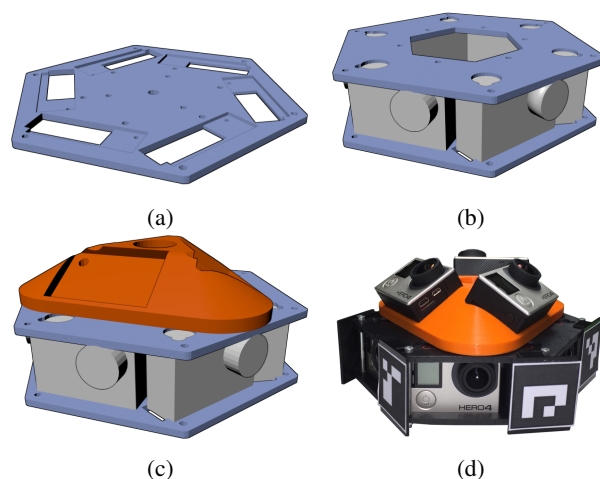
a) Baseplate of our rig. Battery is accessible in assembled rig. b) Assembled circular rig consisting of 6 cameras c) Additional 3 cameras record the residual part of the top hemisphere d) Complete rig including markers.
